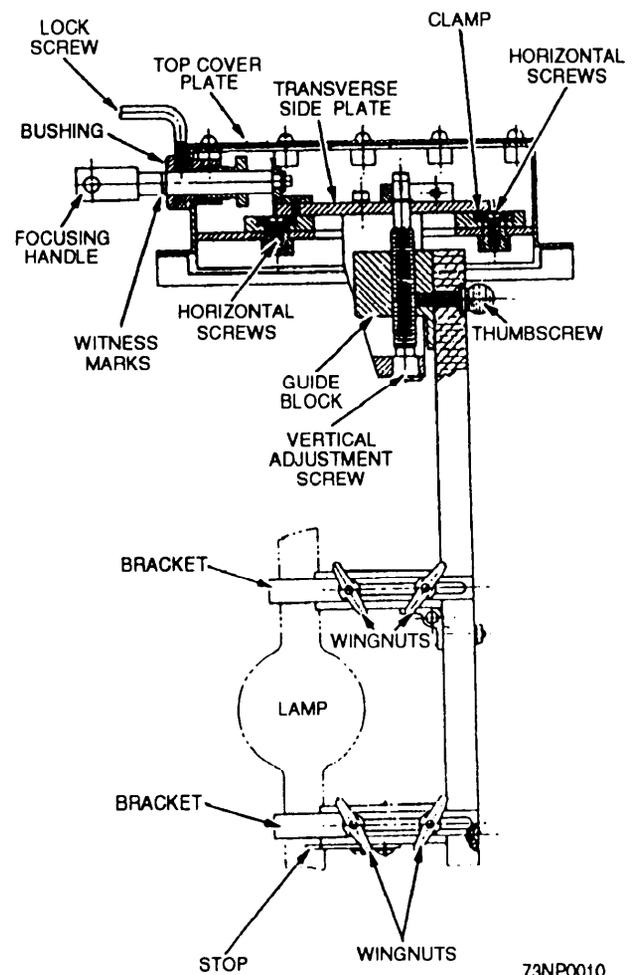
12-inch mercury-xenon lamp adjuster assembly.
